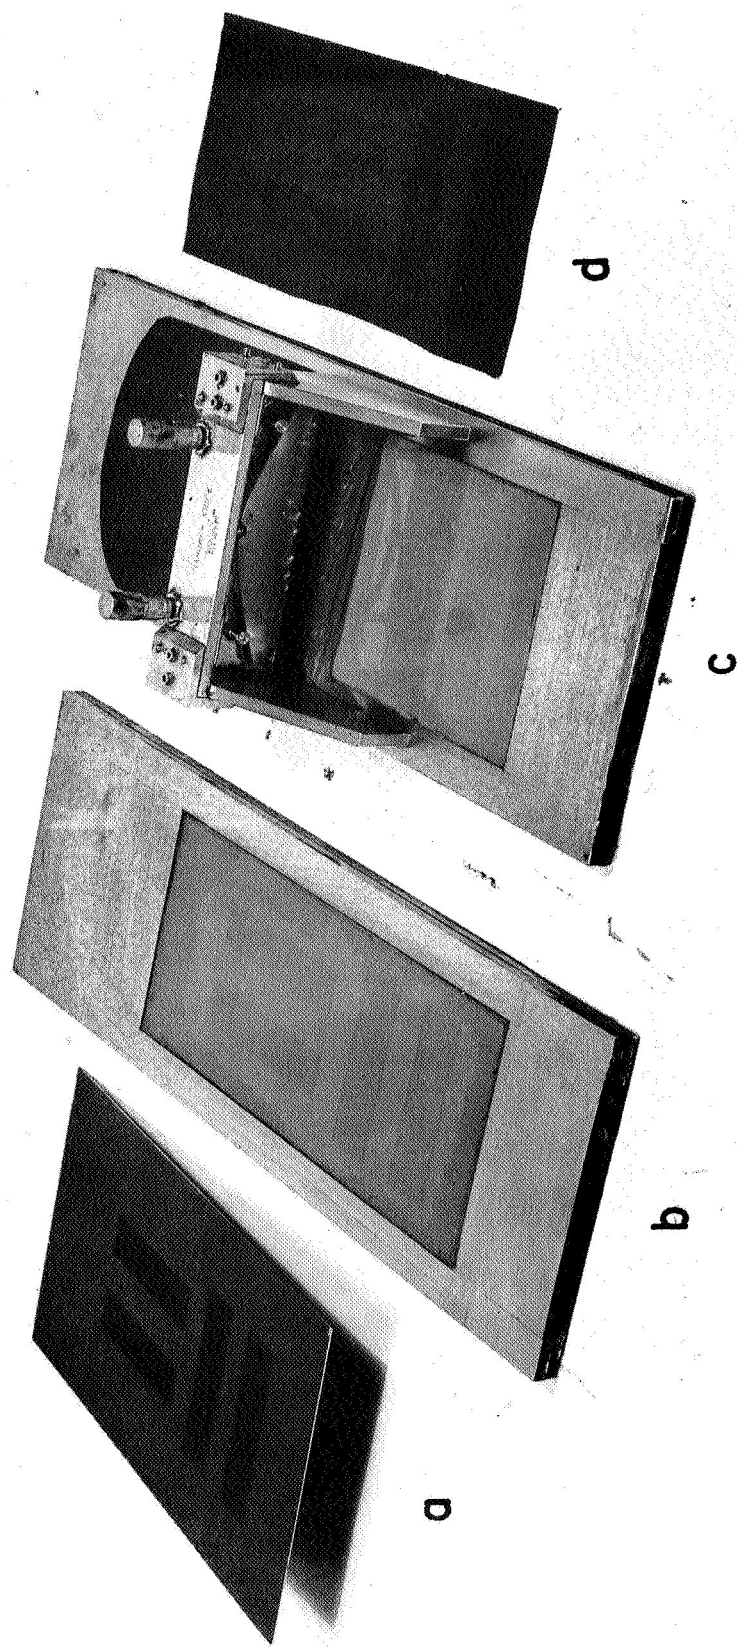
BLADING FERRITE OVER RUBBER PATTERN MASTER (a) LACQUER MASTER (POSITIVE), (b) RUBBER MASTER (NEGATIVE), (c) BLADING OPERATION, (d) FINISHED GROOVED SHEET
